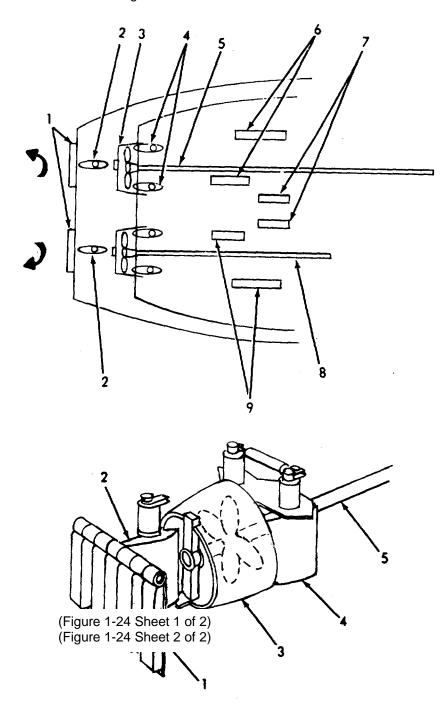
Propellers, Rudders and Keel Coolers (Sheet 1 of 2).
